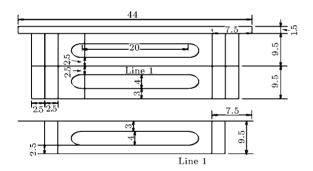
Schematic of the enriched ⁴⁰K dispenser. The top drawing is dispenser planning sketch. Two trenches are made symmetrically in the two sides of line1 and folded over line 1, then fold back two sides of the trench and spot welded. Note that the unit of length is millimetre and the depth of the two trenches is approximately 2 mm. The lower drawing is dispenser in side view.
